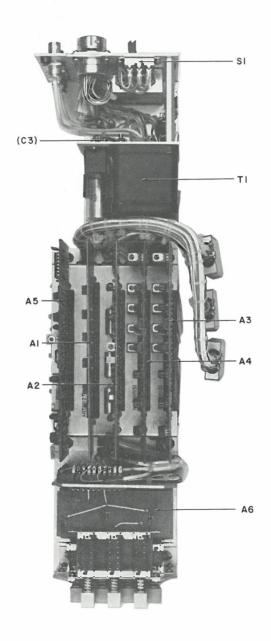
Type 791130 Control Module Assembly, A4, Top View, Component Locations
